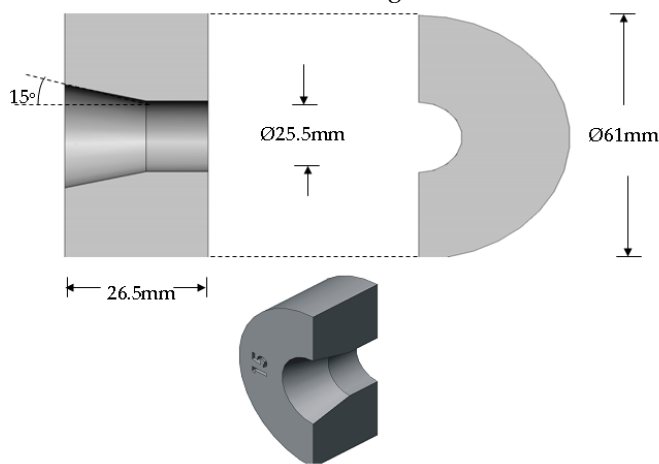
Front, end and isometric view of the die with 15° entry angle.
